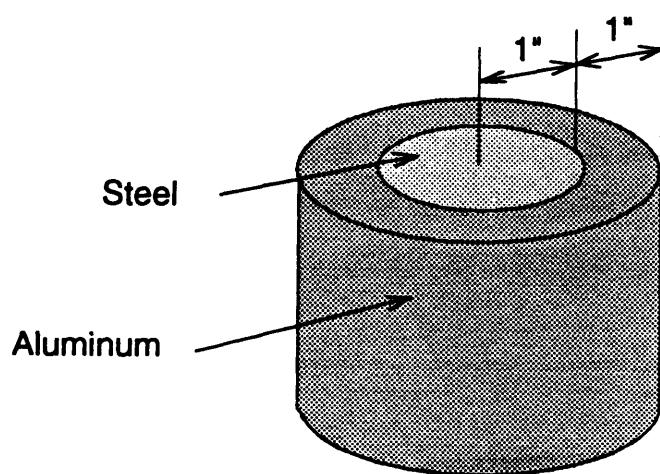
Steel and aluminum shrink fit tube assembly.
